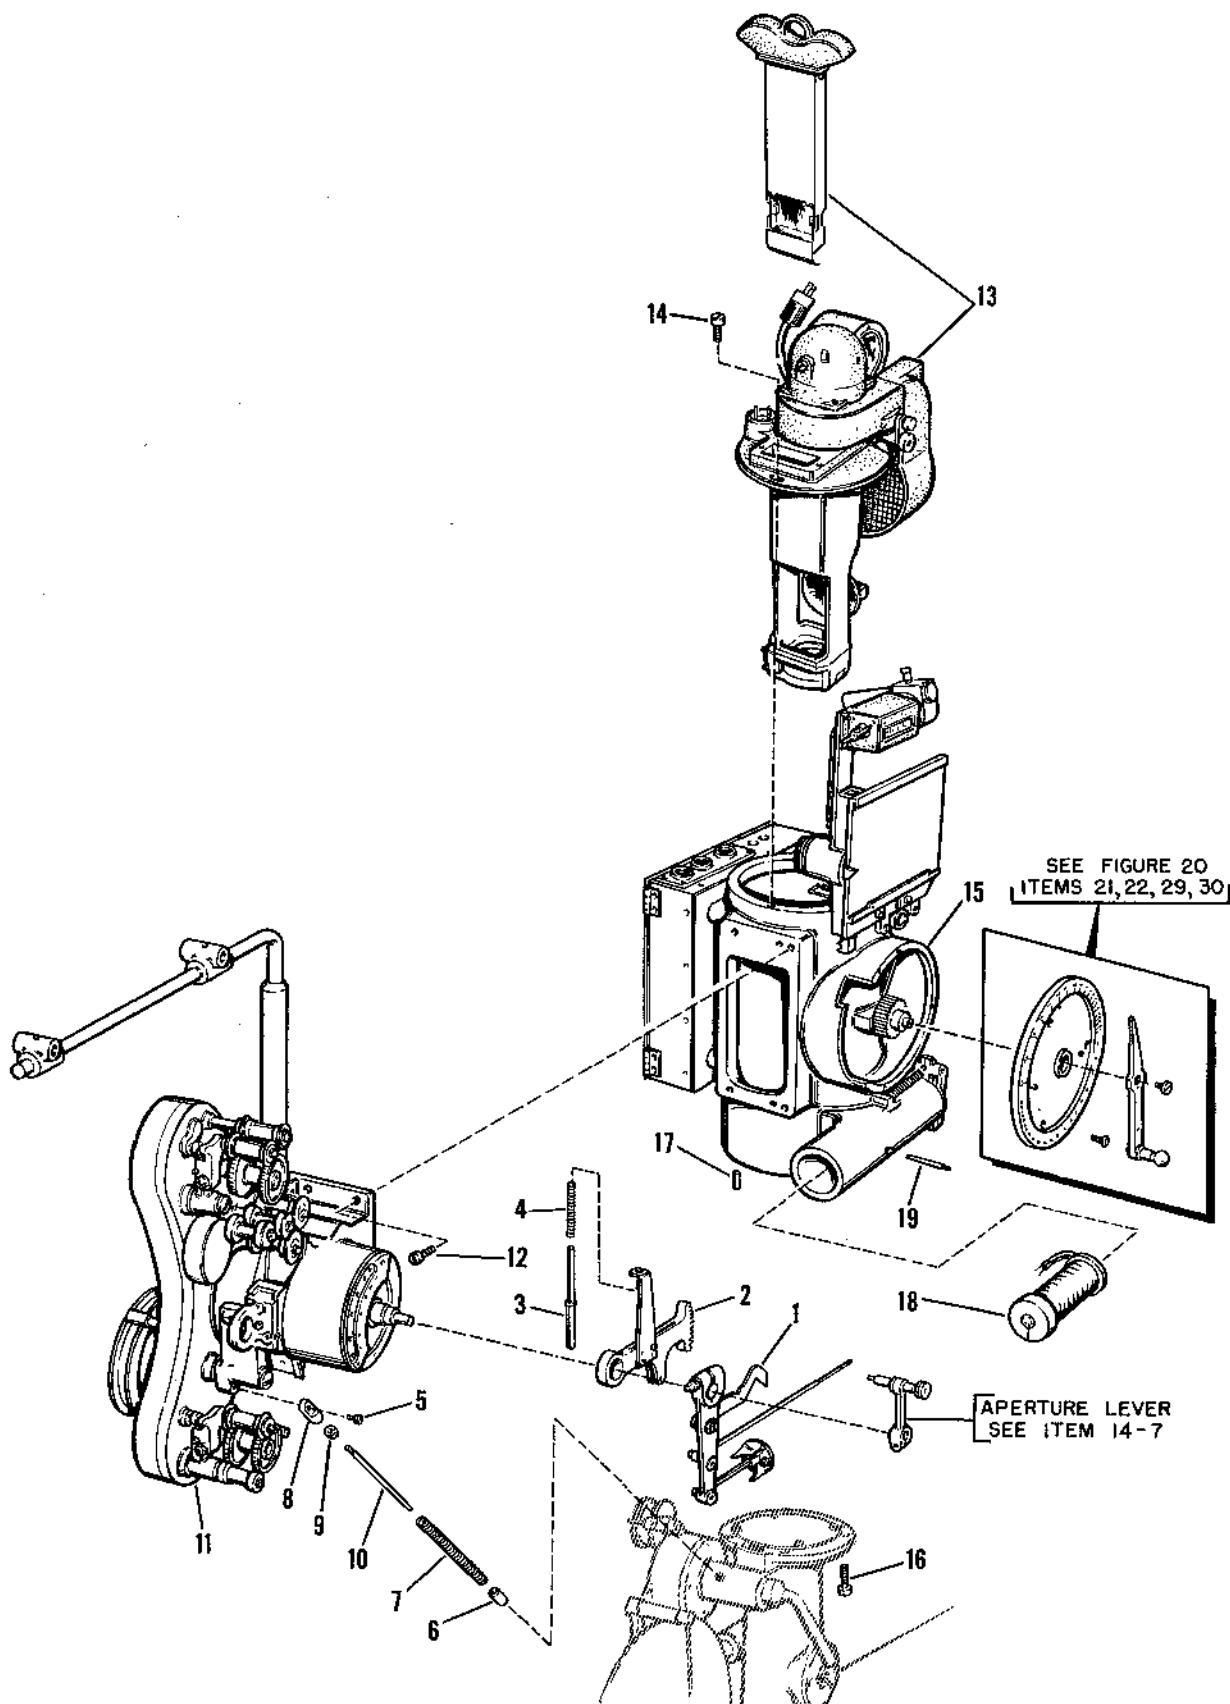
Printer Assembly, Complete - Sheet 2 of 3 Sheets
